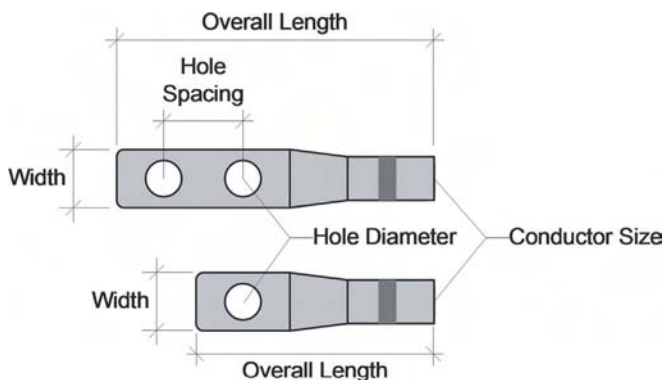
Two-hole and one-hole connector lug dimensions.
